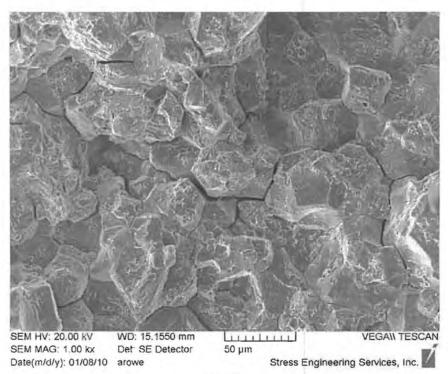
The fracture surface on screw #1 following ultrasonic cleaning. The fracture face appears typical of hydrogen stress cracking.
